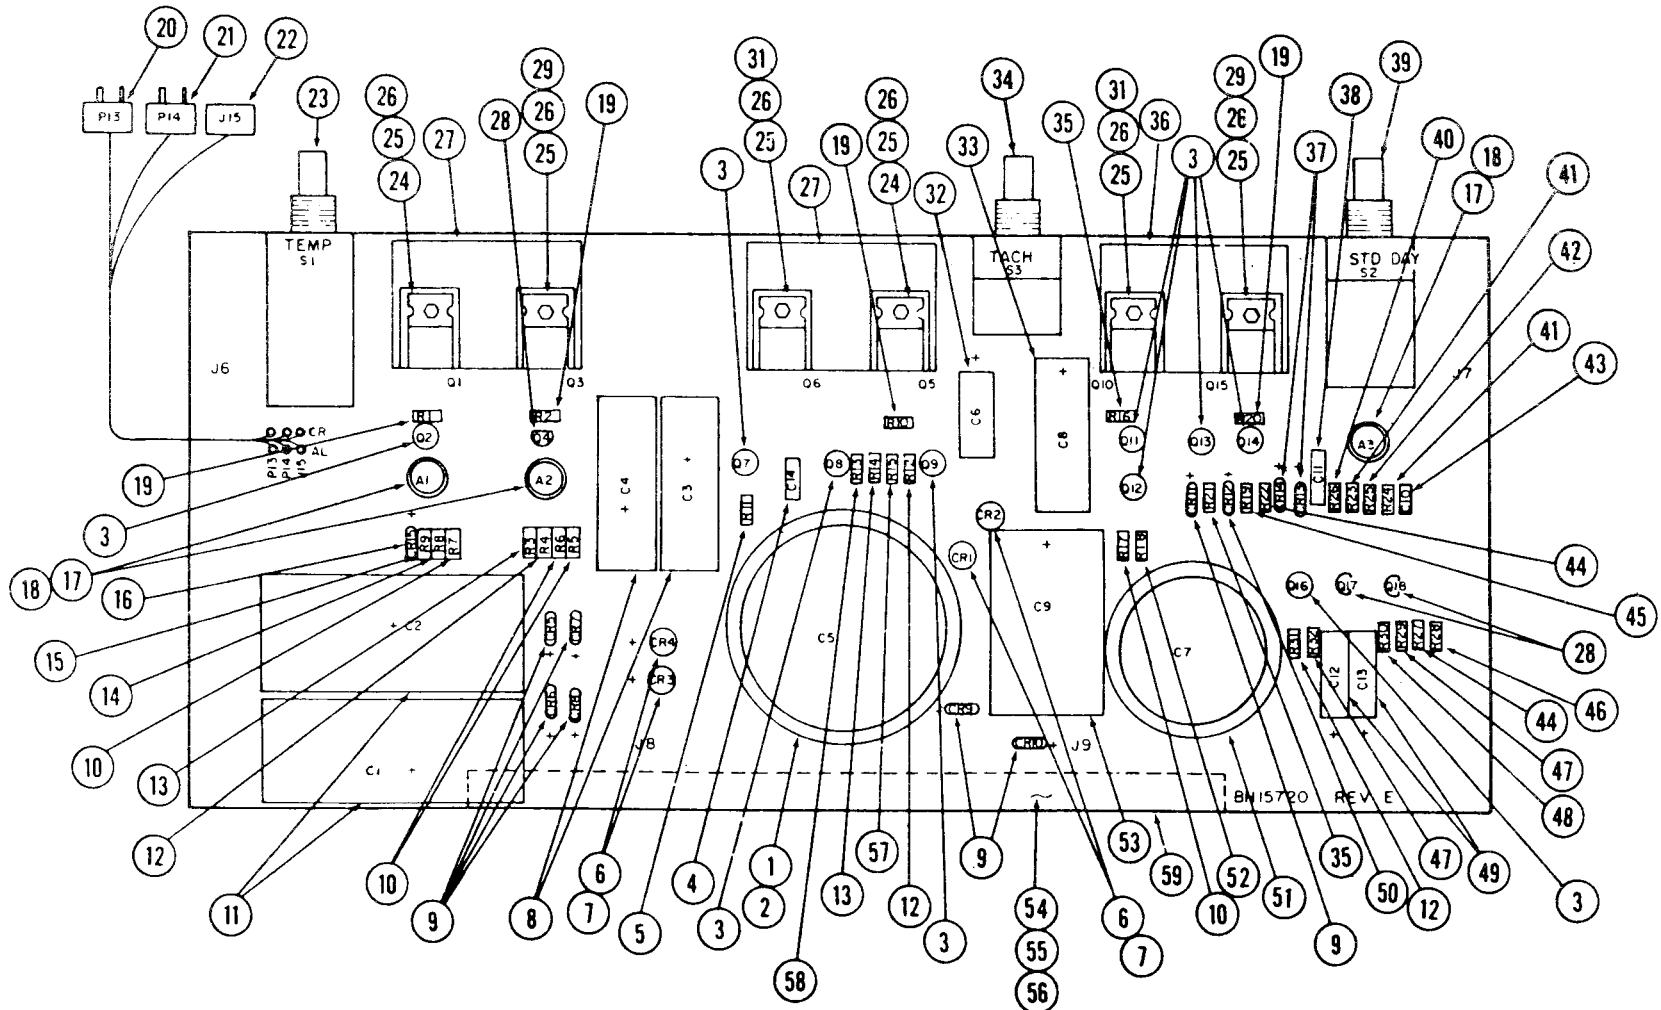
BH15720-3 Switch-Power Circuit Board Assembly
